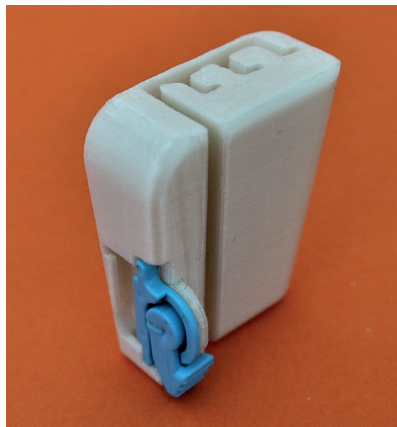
The final prototype, 3D-printed model with a mimicked attachment from the Verza needle guide.
